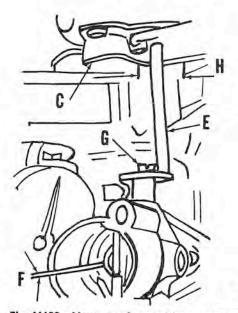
Move speed control lever until throttle shaft (E) is in economy position (H). Loosen the screw (G) and reposition throttle shaft until a clearance of 0.089 exists between edge of throttle and carburetor throat as shown at (F). Clearance can be measured using a No. 43 drill,
